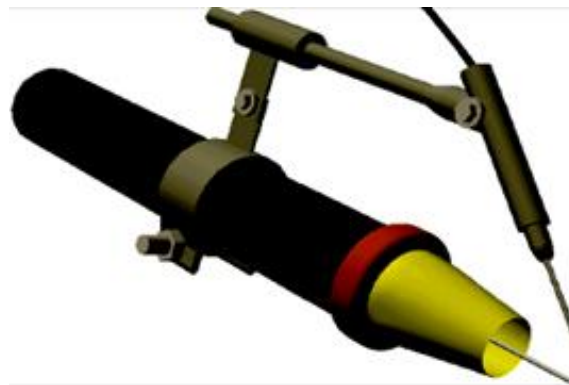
Auxiliary head for wire addition in MIG / MAG process with cold wire.
